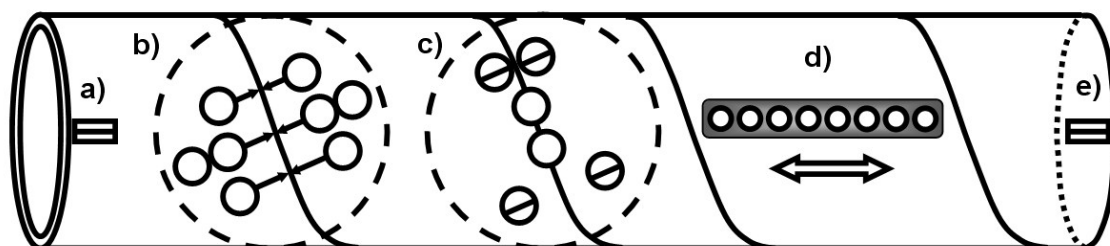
Ultrasonic offline test after hydrostatic test with 22 probes. a) front pipe end testing, b) longitudinal defect detection – internal, external and mid-seam tandem, c) on-bead transverse defect and lamination detection, d) oscillating strip inspection between the welds, and e) second pipe end testing.
